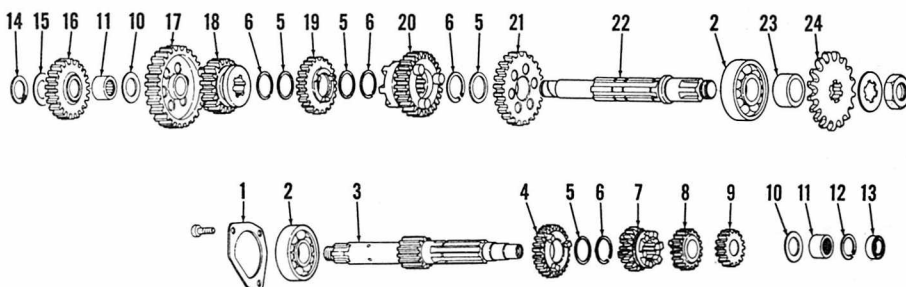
Exploded view of the transmission gears and shafts.
